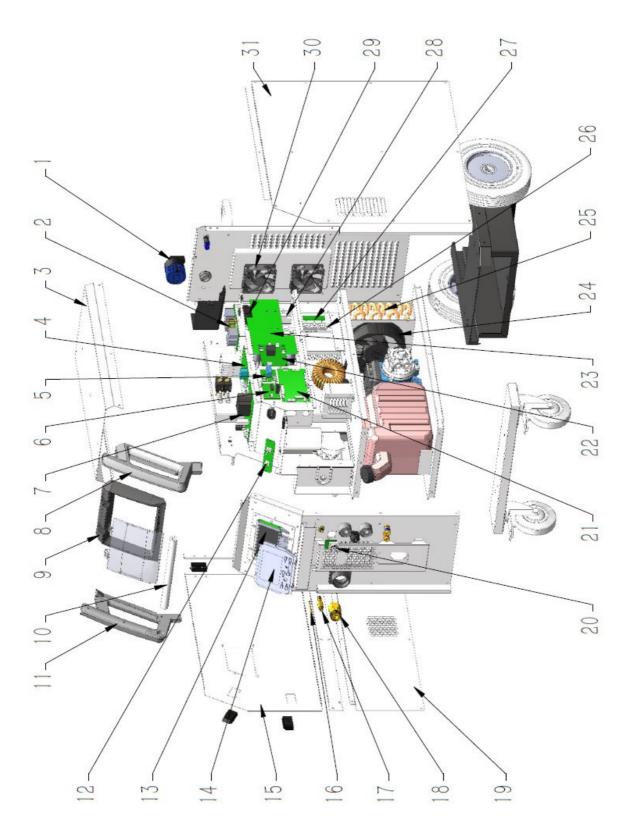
Spare parts drawing Syn-Mig 353-4 W Pulse
